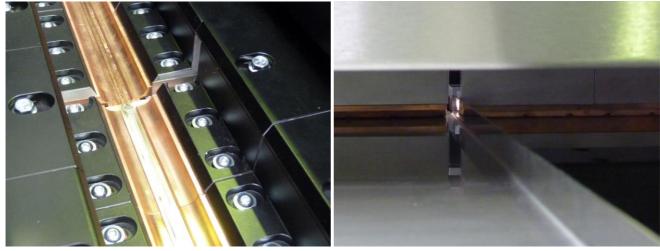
Outside clamping fingers with adjustable gap to accommodate mounting flange of box.
